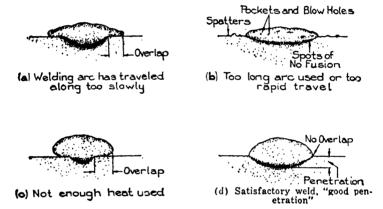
Good and bad weld deposits as made with bare electrodes
